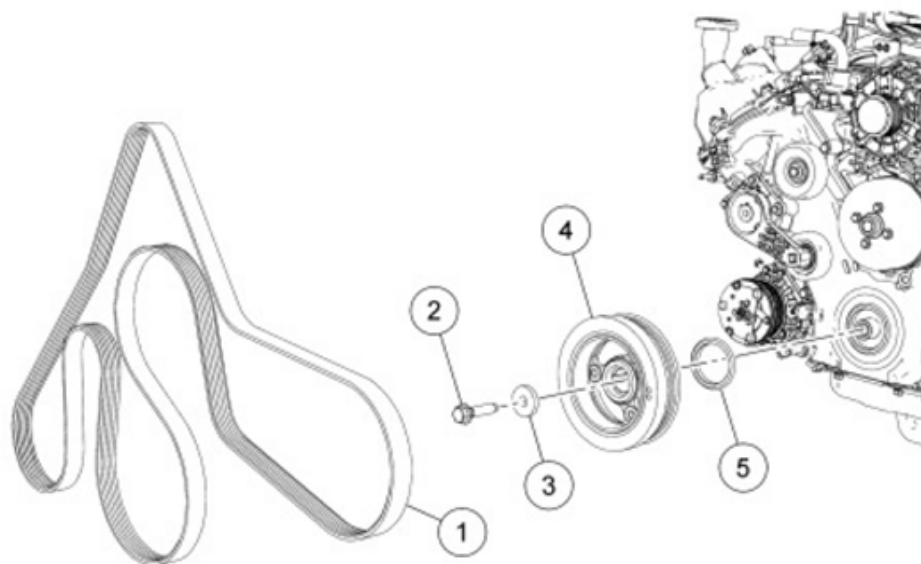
Identifying Crankshaft Front Seal, Crankshaft Pulley And Crankshaft Pulley Bolt Washer
